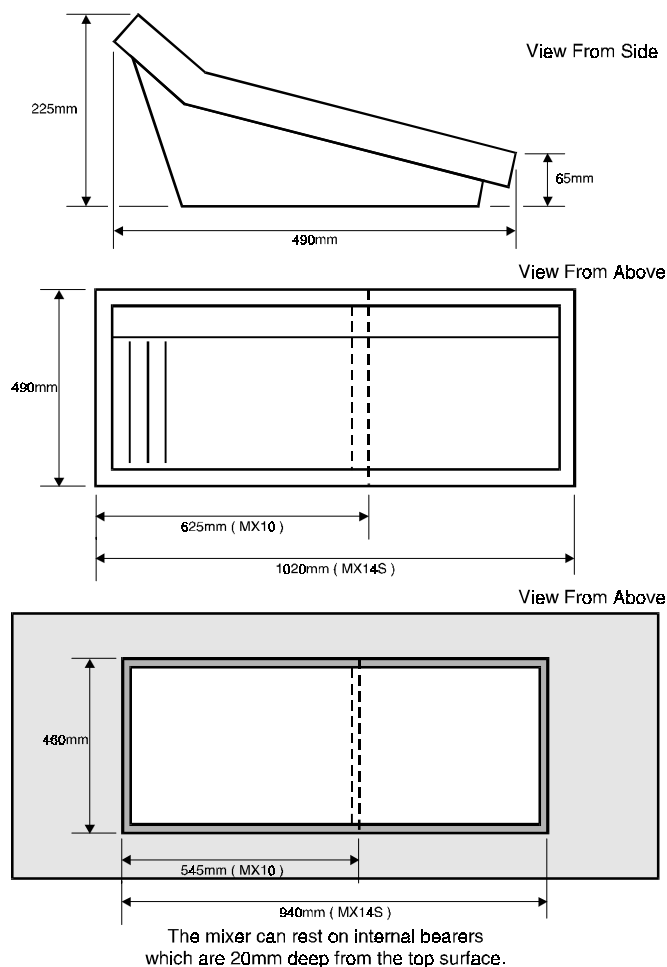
Sovereign Mixer Dimensions and Cut-Out Sizes
